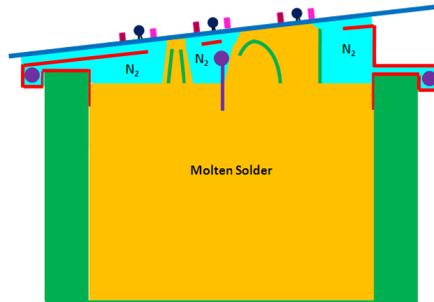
Locating the Front and Back Diffusers out of a Solder Pot
